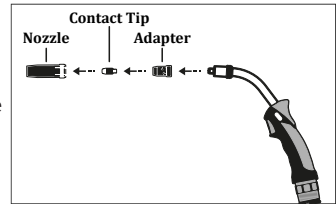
Separation of Nozzle and Contact Nozzle from the Torch
